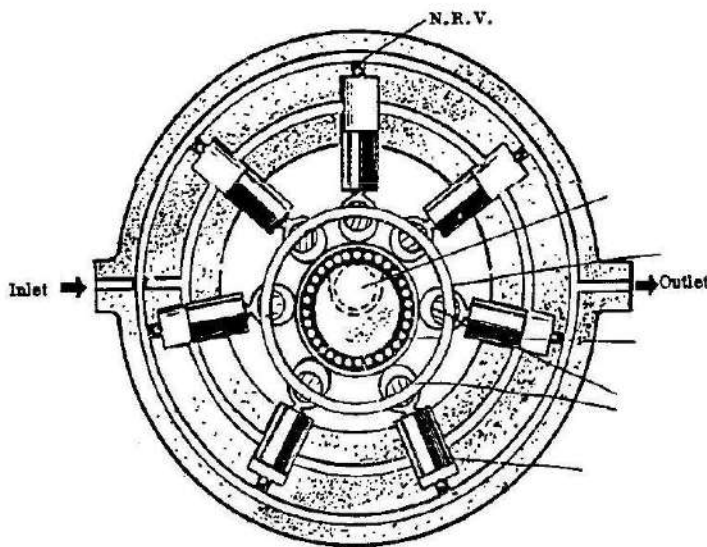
Radial Piston Hydraulic Pump – End View
